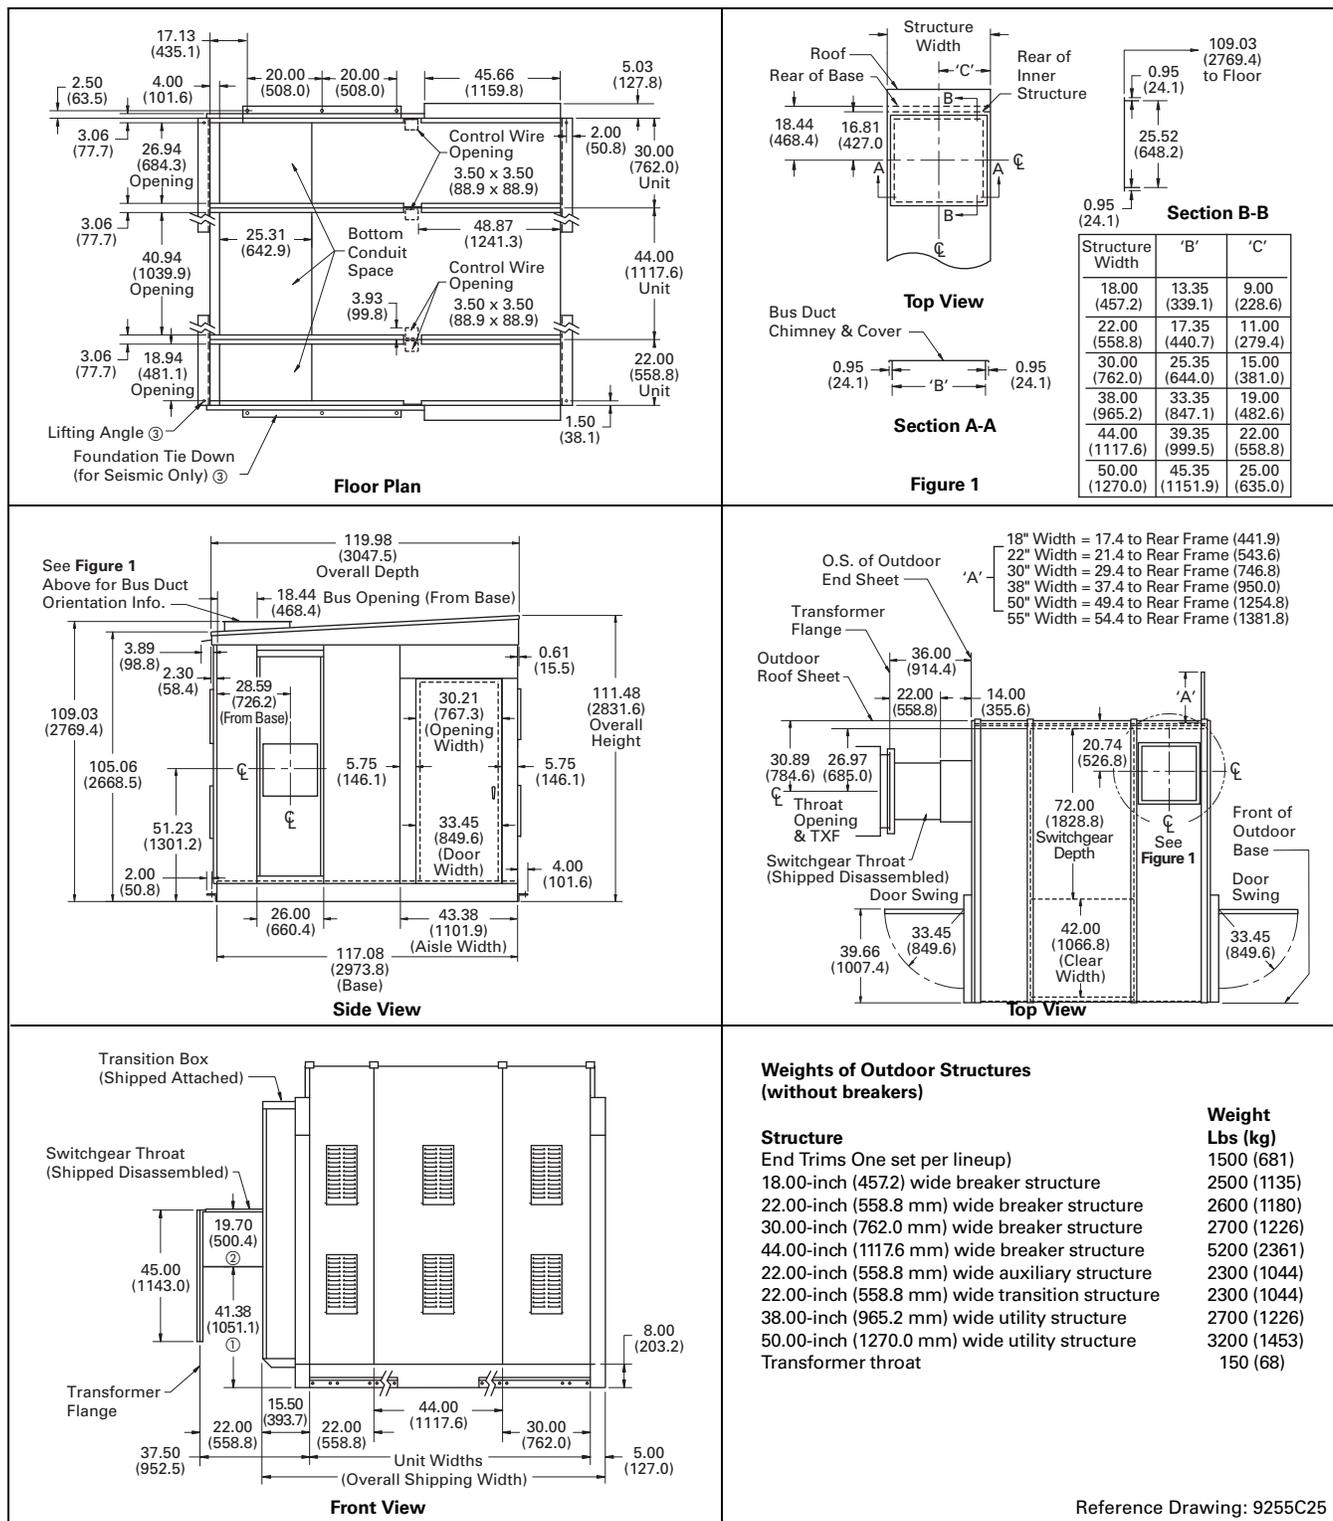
Outdoor Walk-in Enclosure Dimensions in Inches (mm)
